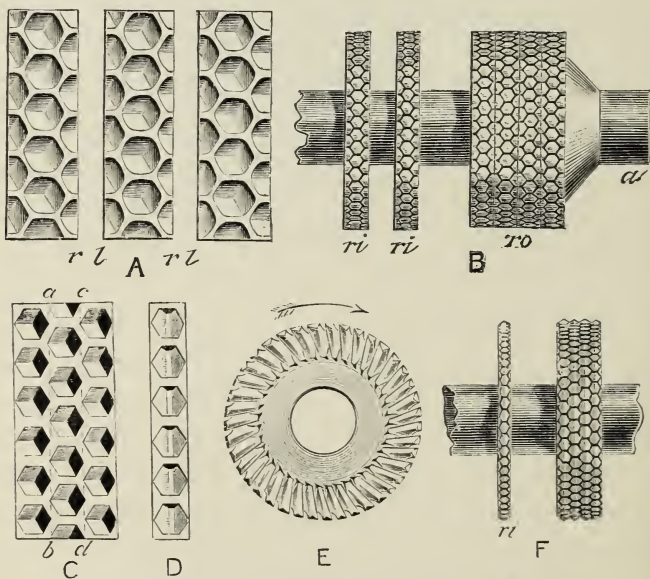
DETAILS OF SECTION-MADE FOUNDATION MACHINE.
